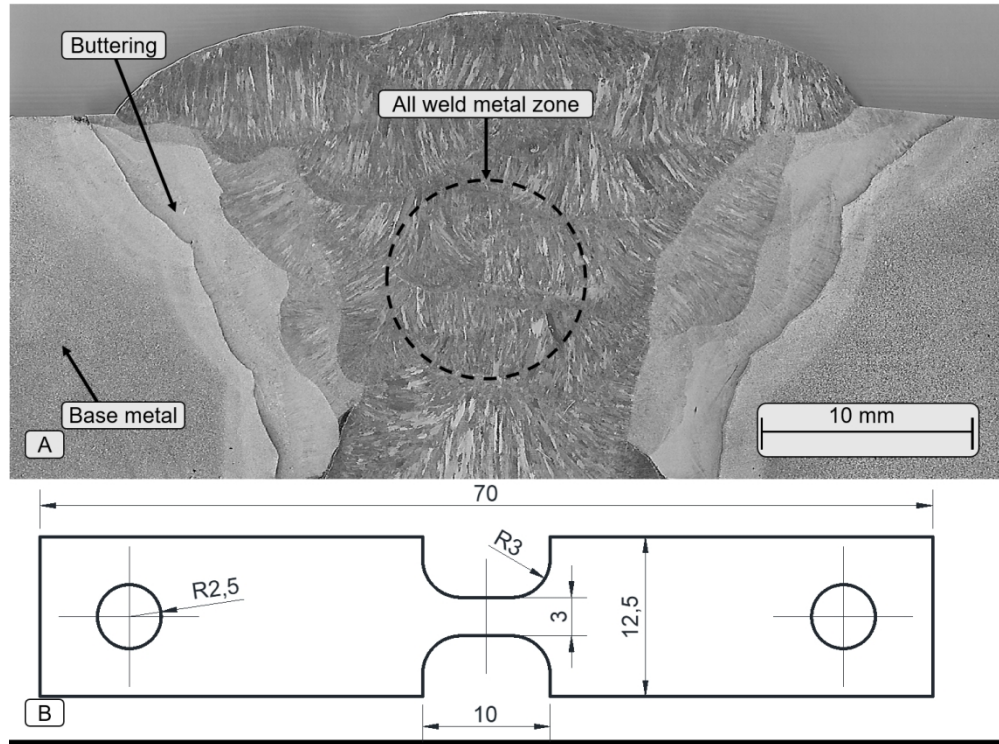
A: All weld metal coupon for SMSS; B: Geometry of the specimens for dilatometry tests, units in mm
